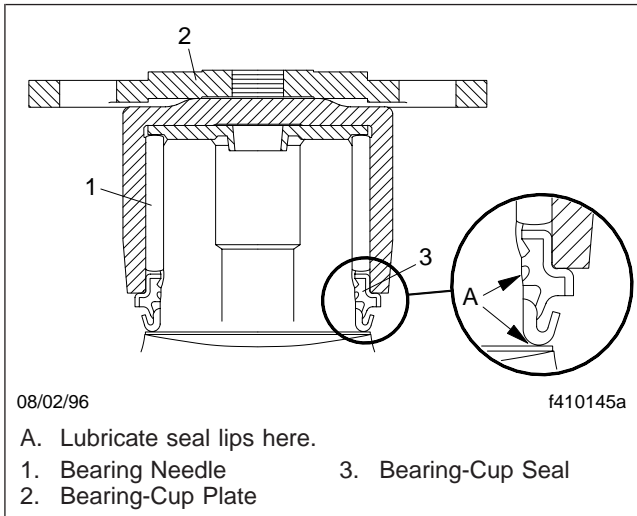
, Sectional View of a Full-Round Yoke U-Joint Bearing Cup
